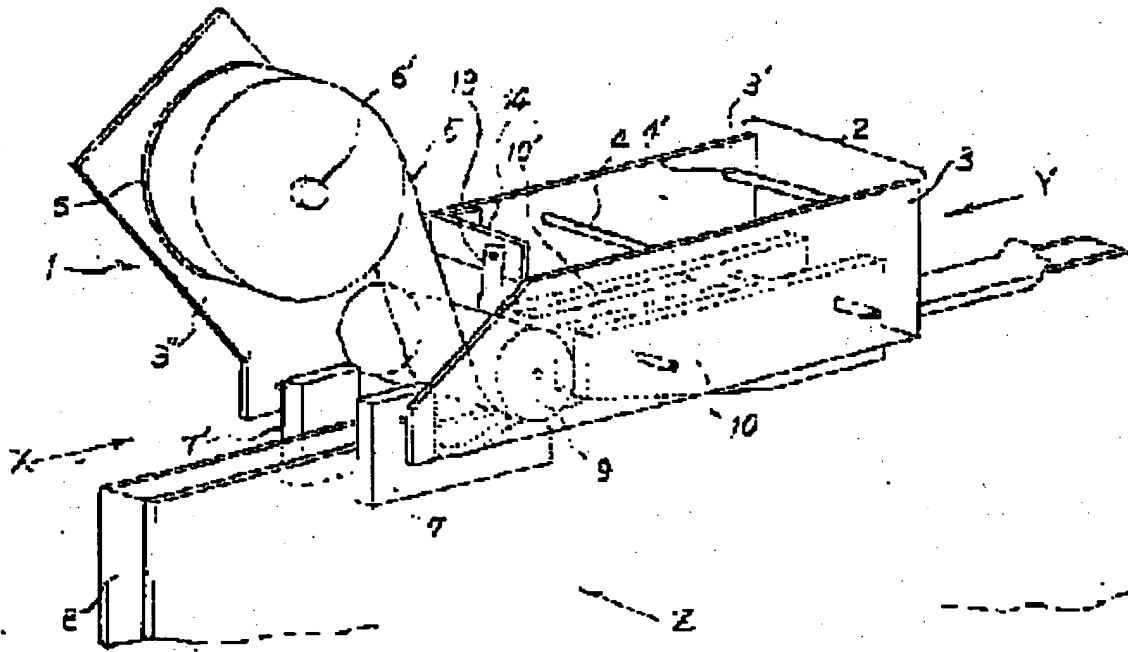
It is the frame member of a tape attachment implement, the tape cutter, and the partial rear view having shown the relation of a  member (crest of a second half section wave) in Y directional vision of drawing 1.
